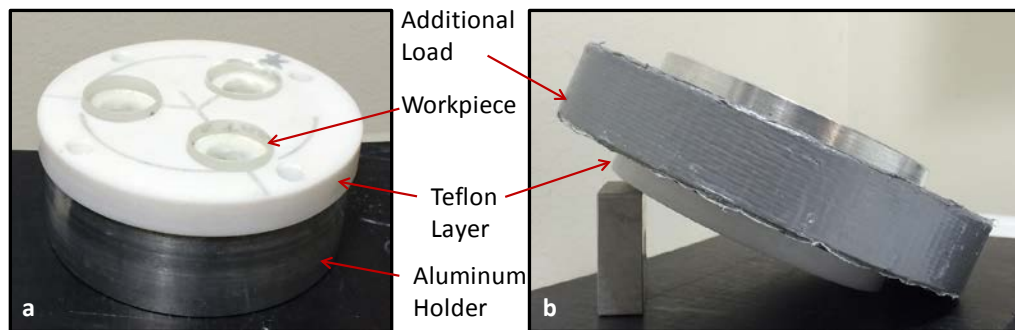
(a) Workpiece holder and (b) additional load (steel ring) attached to the holder.
